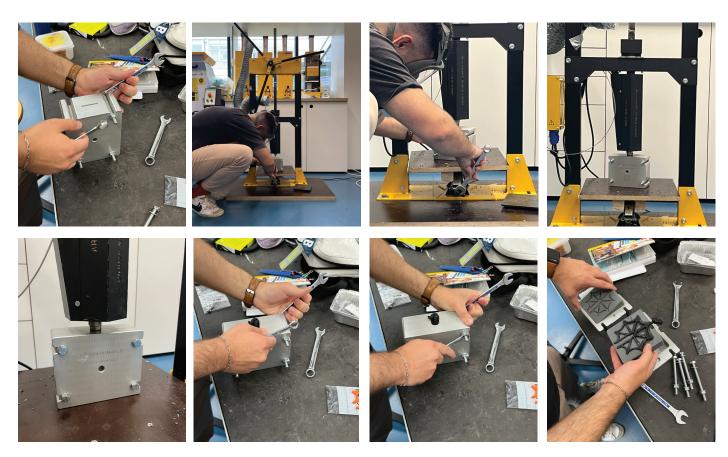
The injection molding process with the resin mould (1) tightening the mould (2) placing the mould to the table plate (3) fixing the mould into the 6mm diameter nozzle (4) injecting (5) removing the mould (6) removing the bolts (7) removing the sample (Source: Author)
